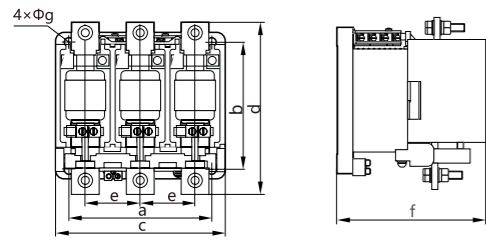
CKJ5-630 Appearance and Installation Dimensions
